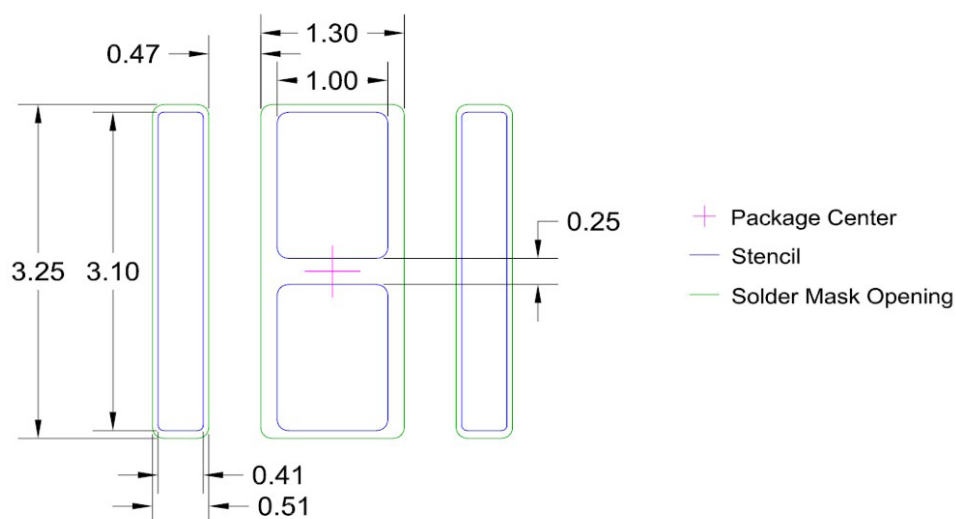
Recommended PCB solder pad layout for LUXEON HL2X-V
